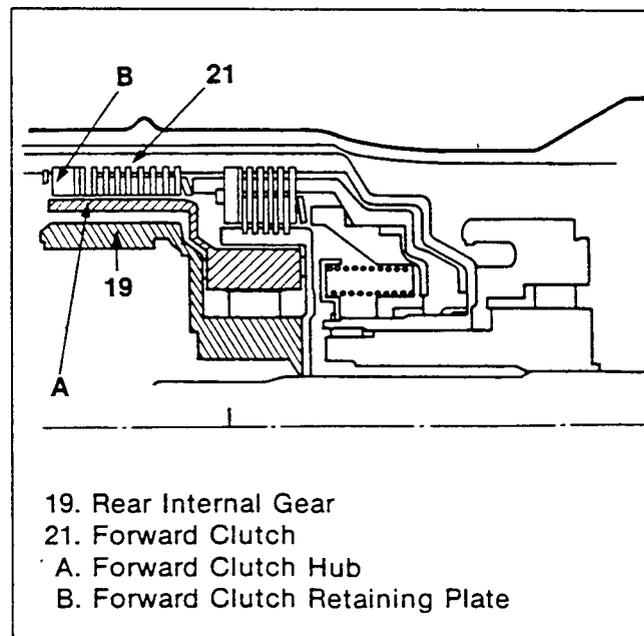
Forward Clutch Hub and Rear Internal Gear Installation (2)
